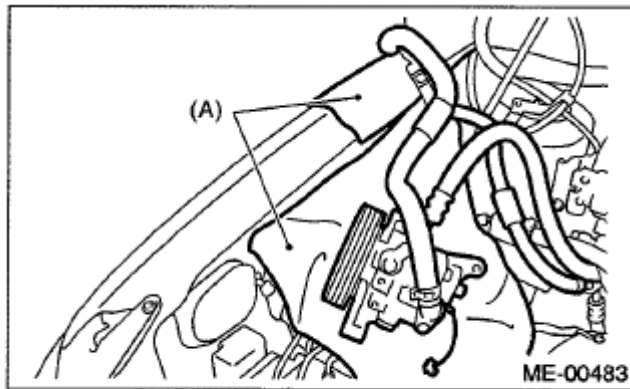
Locating Power Steering Pump Bracket Bolts
